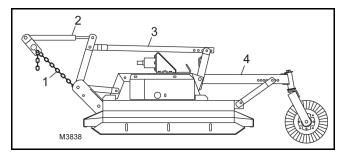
Cutting Height Adjustment - MD80 (Mounted Model)
